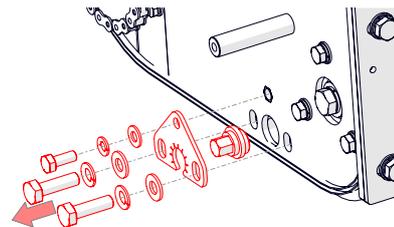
I - Remove the RH 3 x shear blade bolts and cam
